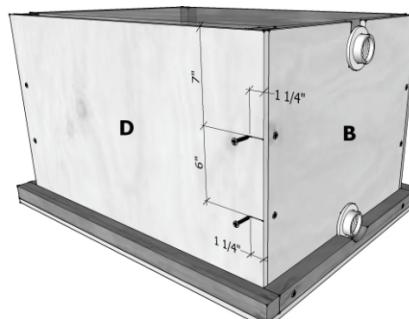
Liner and final panel are fastened to rest of sides, screws placed 1 1/4" from edge.
